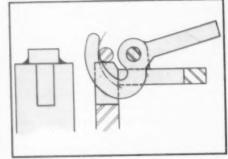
(left). One application of the screw bushing is shown here, where they are designed in hinged leaf for loading work. Fig. 20 (center) shows eyebolt and handknob combination which holds hinge
